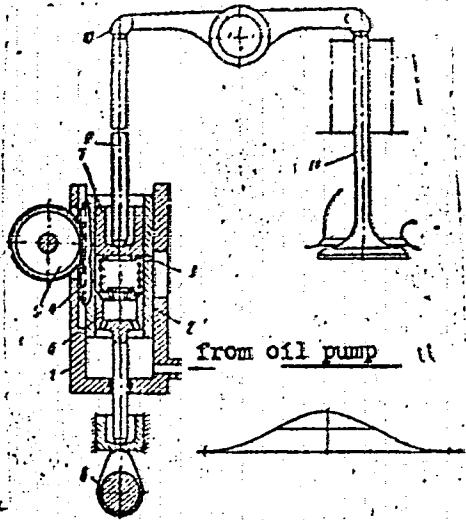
Hydraulic link. 1 - housing; 2 - intermediate sleeve;
